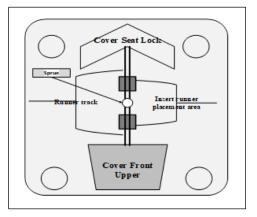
Type A Mould Components in the Runner Area where Improvement will be carried out
